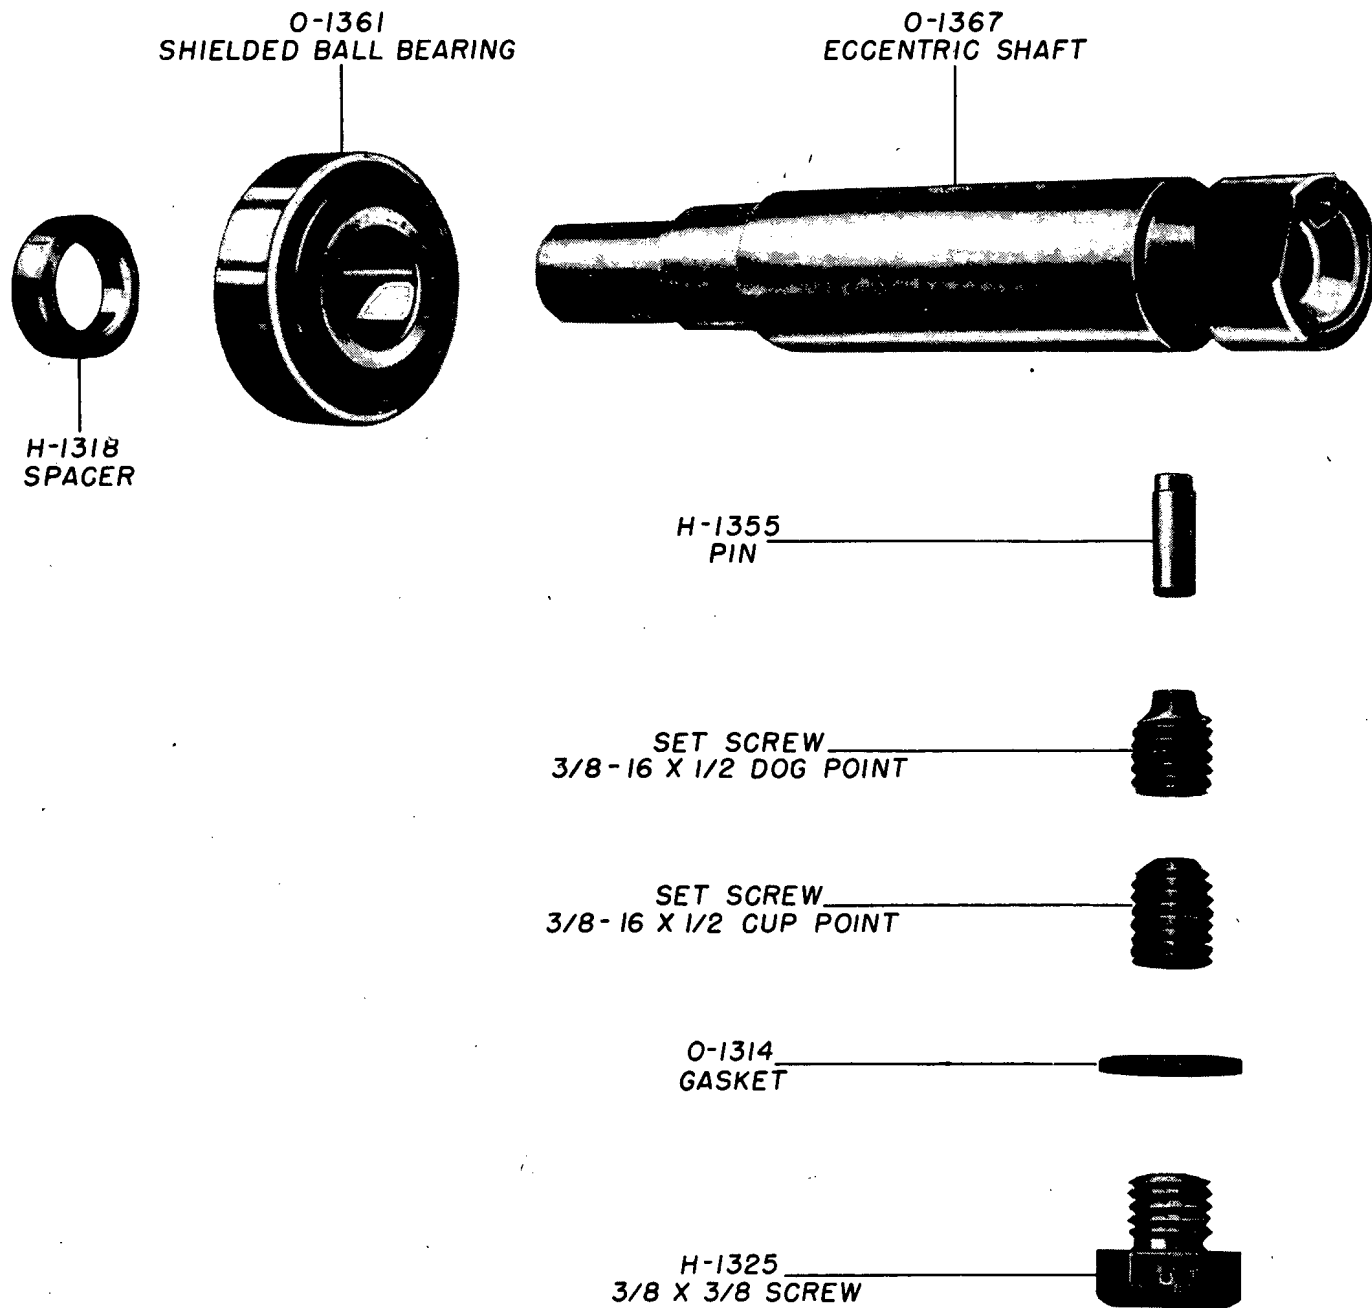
Bevel Gear Back-up Bearing Eccentric Shaft
